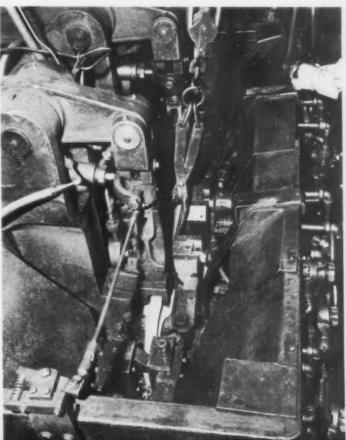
In this 6-in. upsetter the flange of a live rear axle shaft has been formed. Copper tubes supply a soluble oil solution to keep dies cool and wash away scale.
